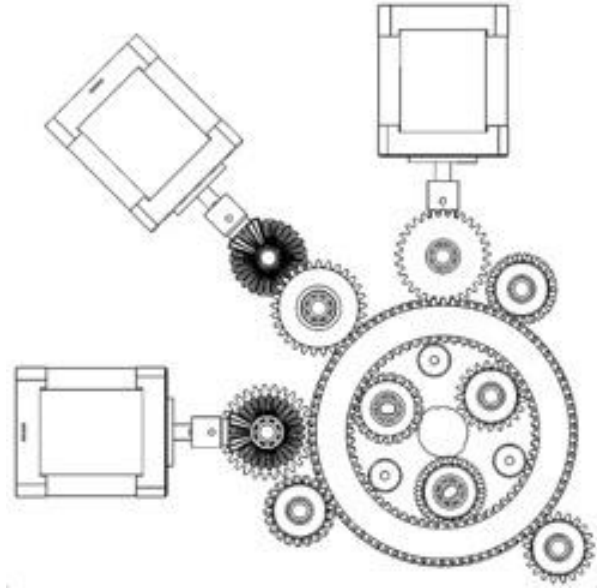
The internal gearing of the Robotic Actuator and the motor's position
